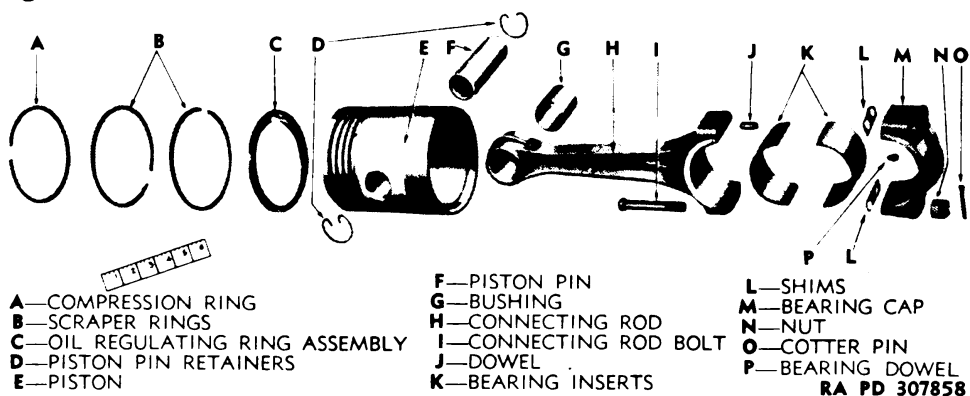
Connecting Rod and Piston Assembly Disassembled
